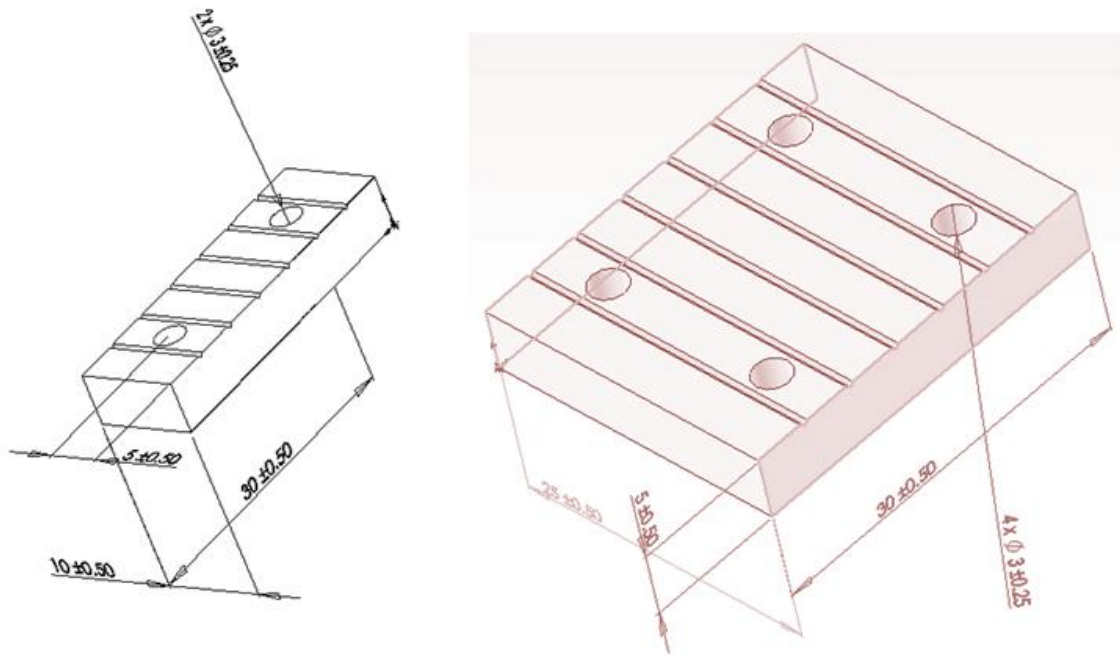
Schematic diagrams and dimensions of the jig used for polishing and fabrication of joint level tensile samples.
